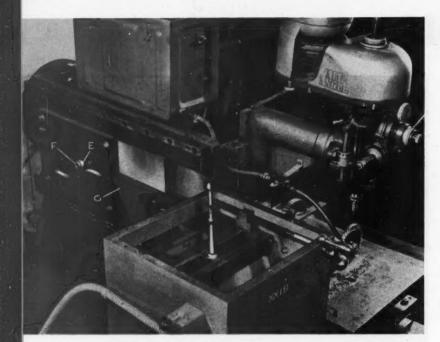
Another close-up view, this one showing mechanism whereby movement is imparted from the crank-handle to the cam follower which rocks the spindle head clockwise or counter-clockwise
